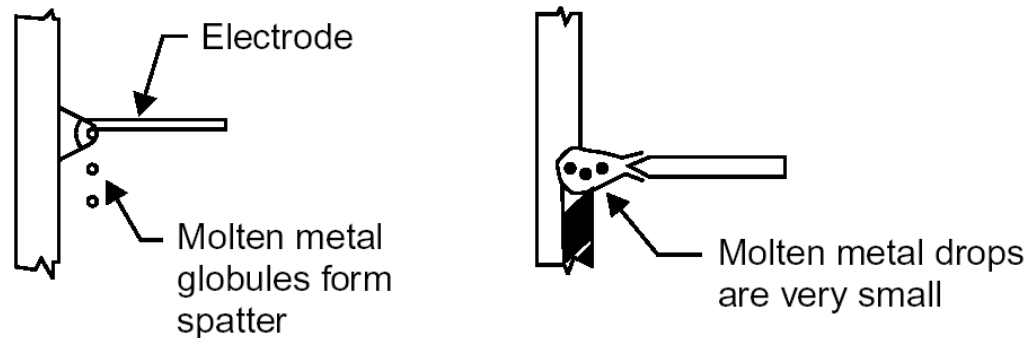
Horizontally held electrode wires are shown producing globular and spray transfer during gas-metal-arc welding
